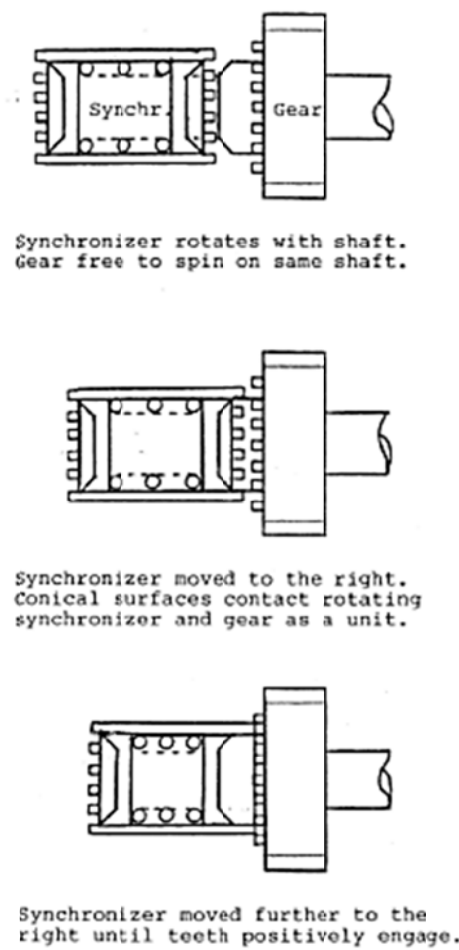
Synchronizer moved further to the right until teeth positively engage
